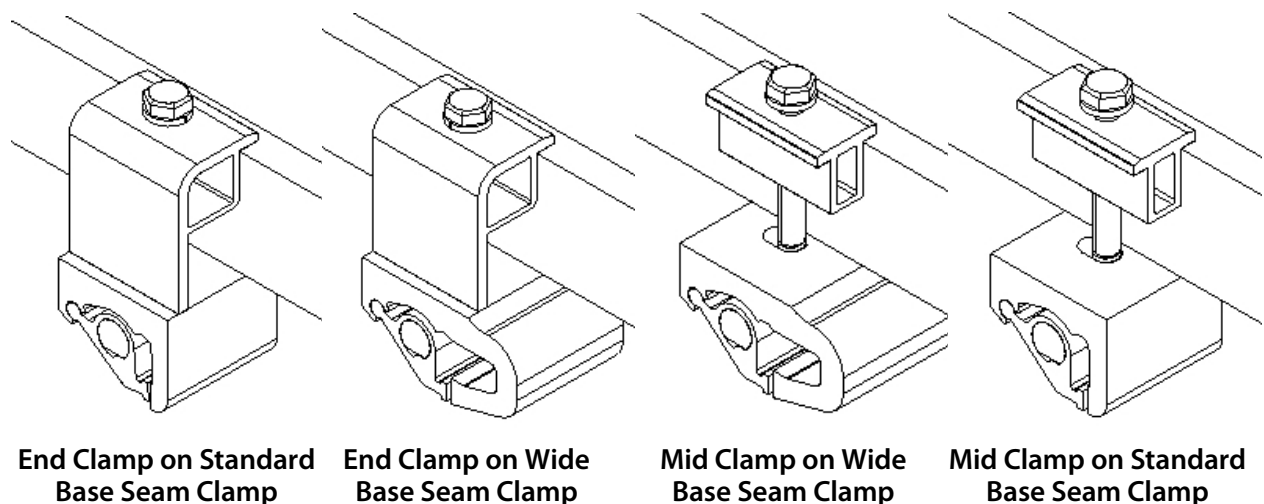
Mid Clamp And End Clamp on Seam Clamp Assemblies
